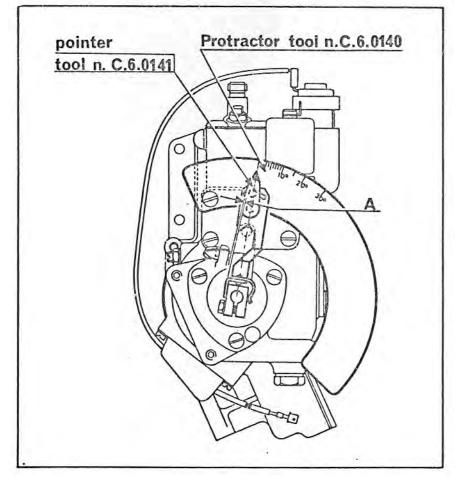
CHECKING THE CONTROL UNIT LEVER ANGLE
